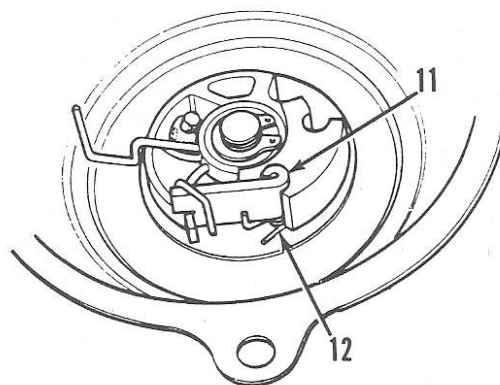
Ensure starter pawl (11) and return spring (12) are installed as shown. Parts are also shown in Fig. S1-9.
